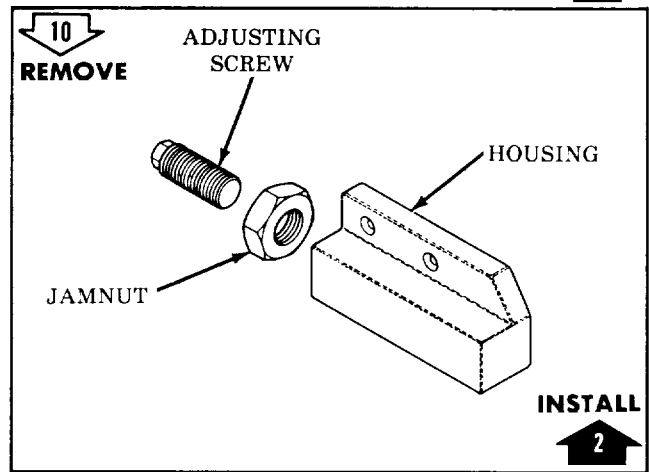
Repair of main winch level winder assembly (Sheet 1 of 2).
